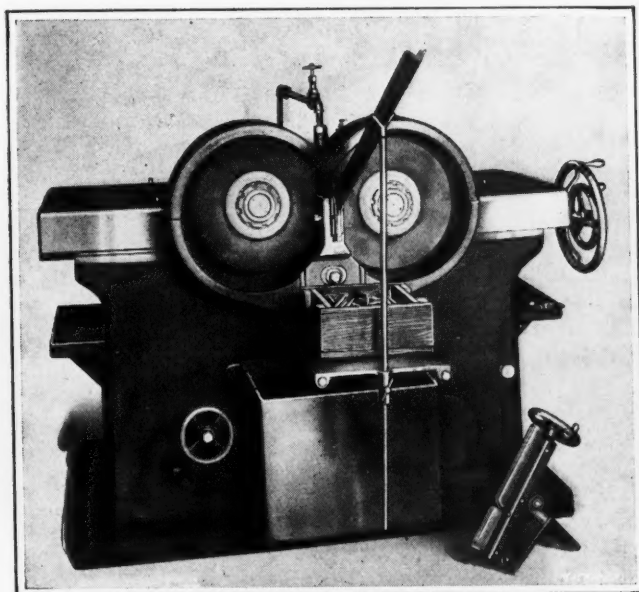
Heim Centerless Roll Grinder with Wheel Housing Cover removed
